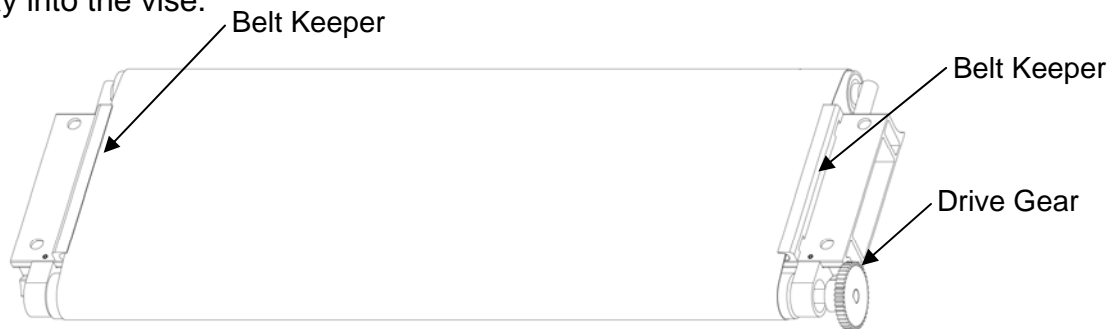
SIDE VIEW OF THE BELT TRAY TENSIONING MECHANISM
